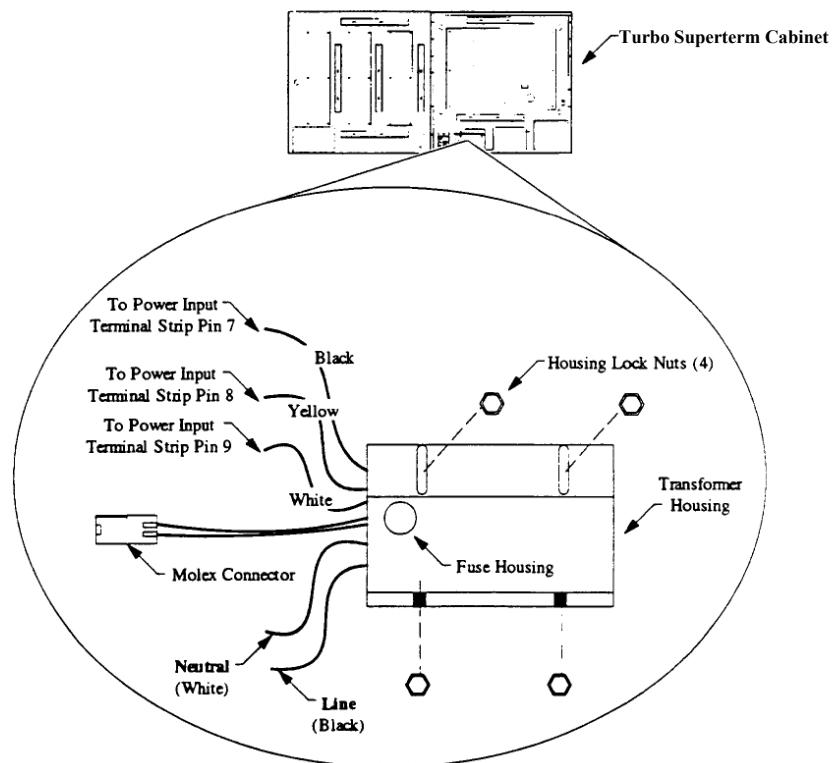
Replacing the Turbo Superterm Transformer Assembly
